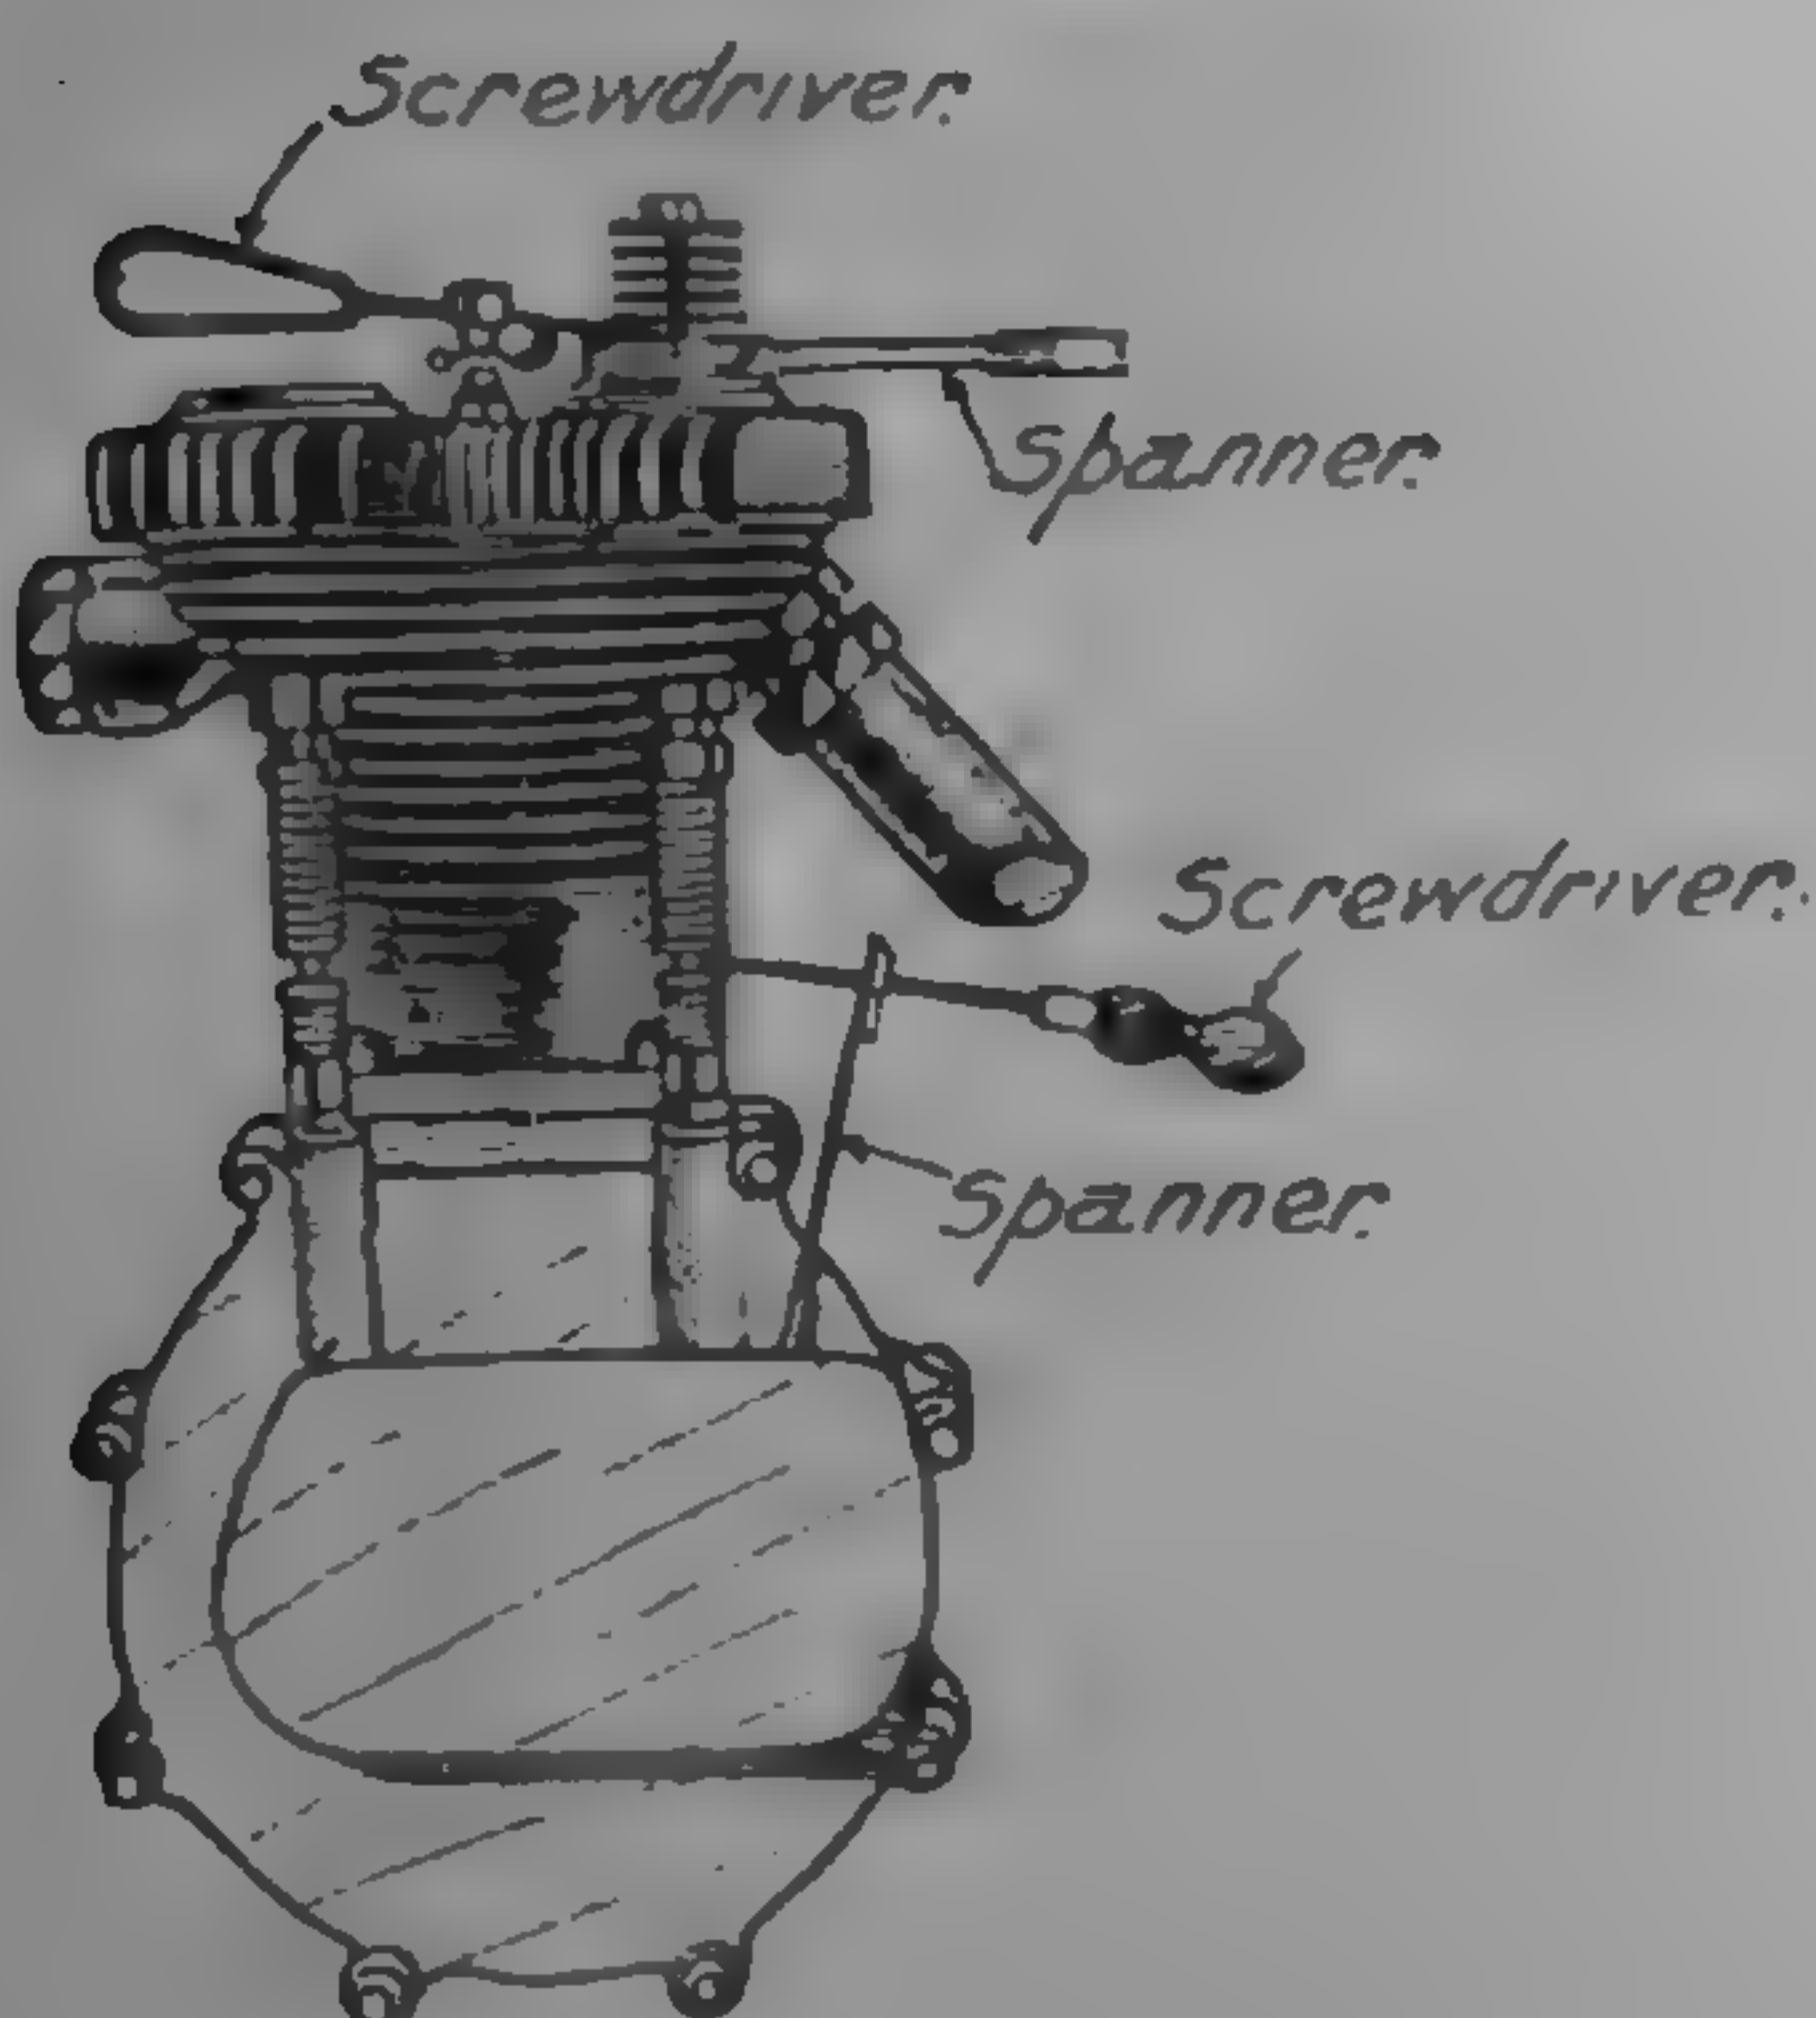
Illustration No. 5.—(Top) Unscrewing an Ariel exhaust valve cap. (Bottom) Compressing the exhaust valve spring.
